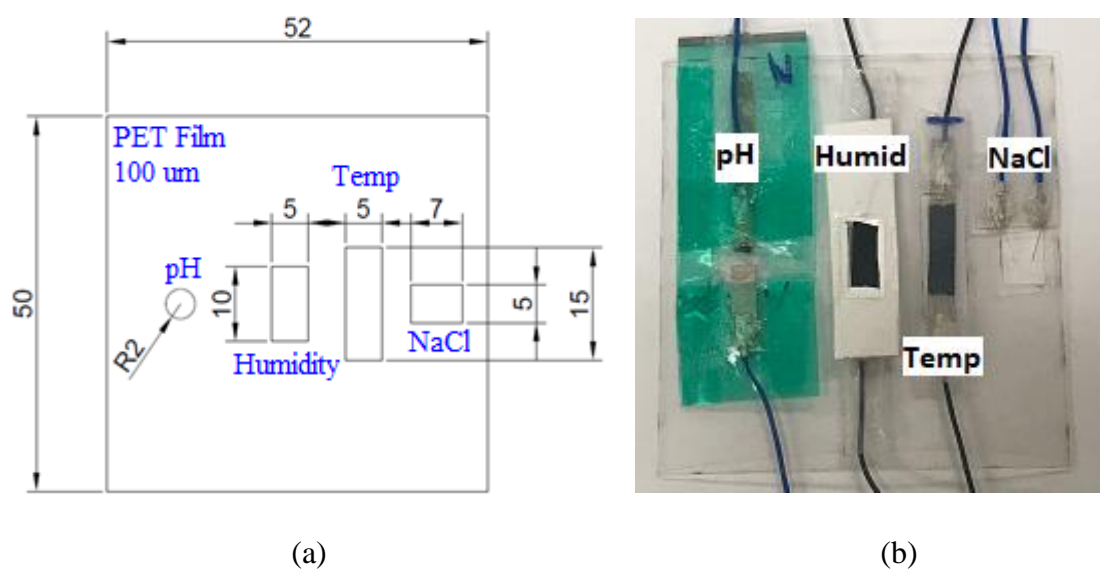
(a) Sensor casing design. (b) Actual sensor casing with sensors mounted.
